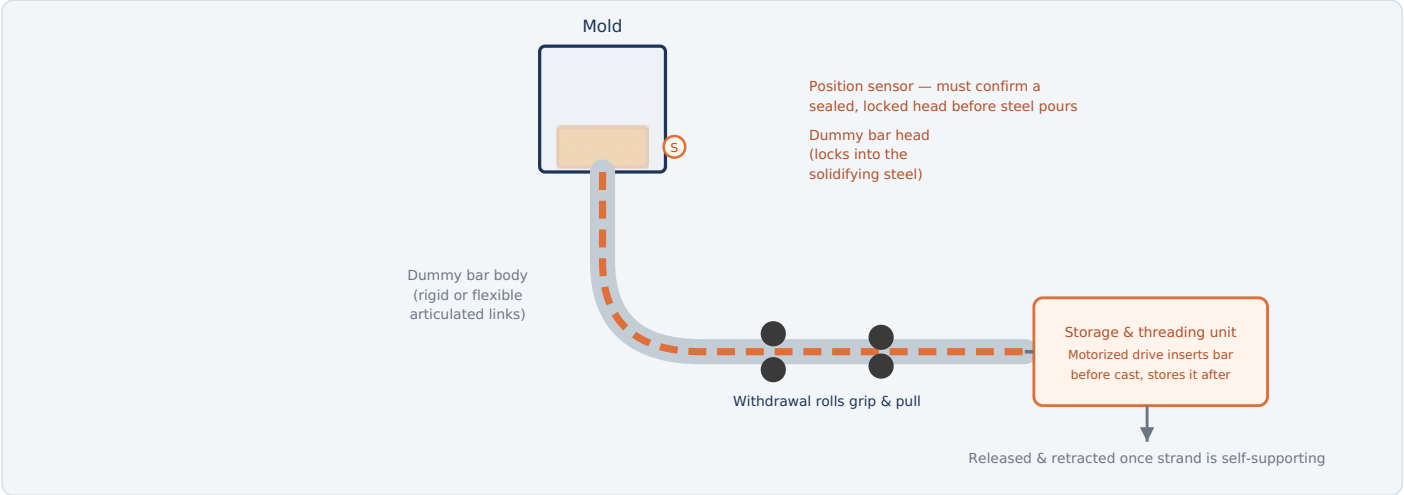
Before casting starts, the dummy bar is threaded up through the machine and its head seals the open mold bottom; once real strand builds up enough to support itself, the bar is released and stored for the next cast.
